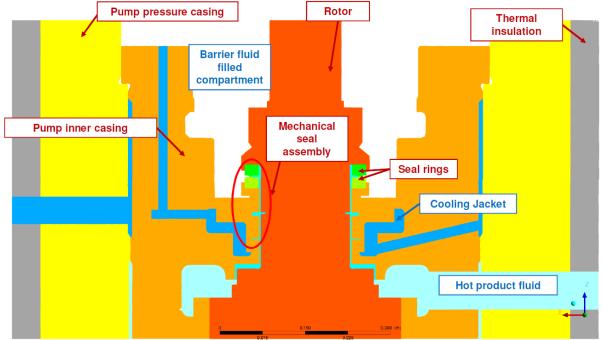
Integration of cooling jacket into subsea multiphase pump; Illustration shows extract of subsea pump cross section at the drive end (DE)
